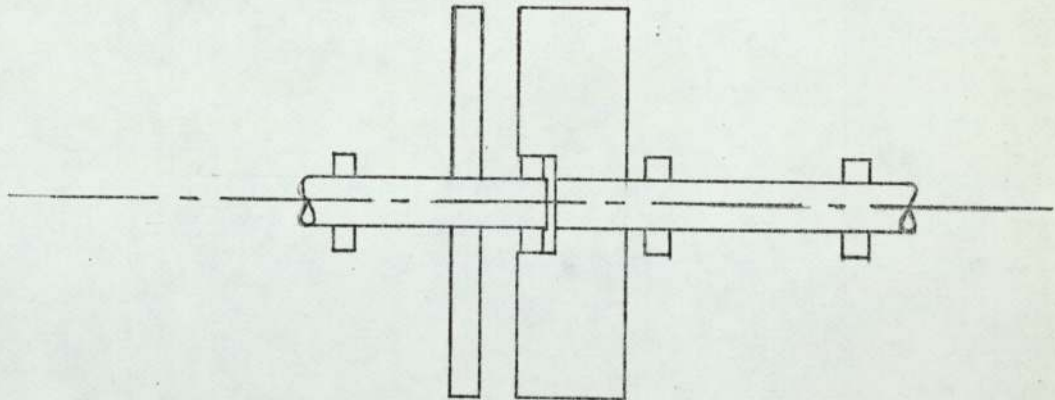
Primitive Disc Machine with Pilot Bearing
